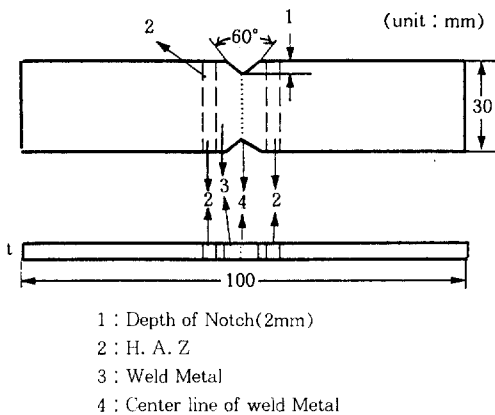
Schematic diagram of GTA-welded specimen for the tensile test and corrosion test
